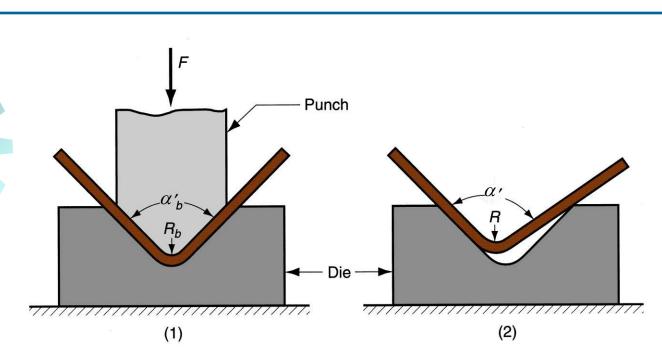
Springback in bending is seen as a decrease in bend angle and an increase in bend radius: (1) during bending, the work is forced to take radius  $R_b$  and included angle  $\alpha_b$  of the bending tool, (2) after punch is removed, the work springs back to radius R and angle  $\alpha$ .
